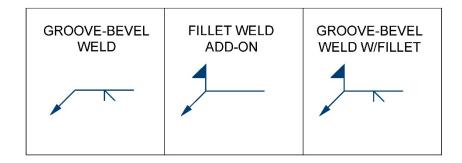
Welding symbols can be added one upon another. In this example you start with the groove-bevel weld on the left and then you add the filet weld add-on. This results in the final figure on the right.
